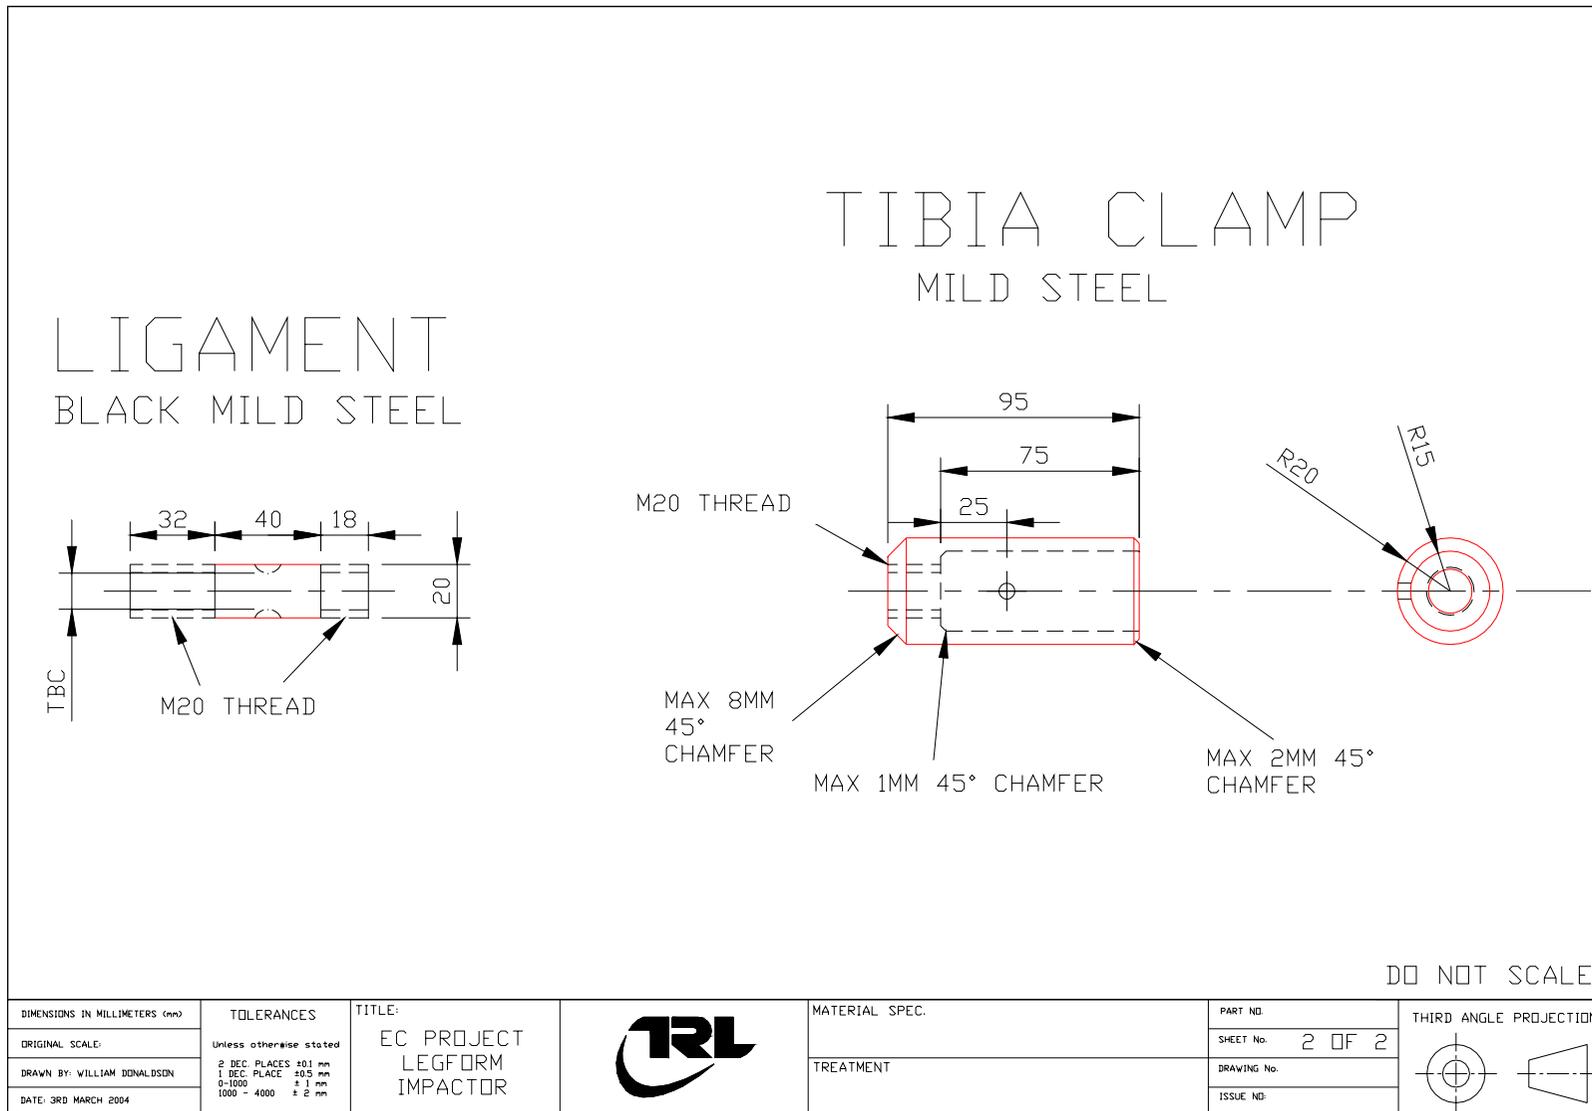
Sensor legform drawings – ligament and tibia clamp
